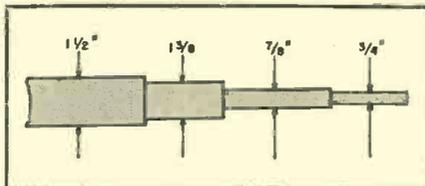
Construction details of elements. All of the tubings used have .049" walls.
